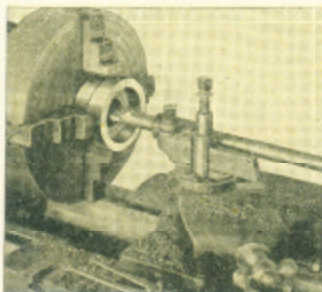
Making a Large Bushing Held in a 4-Jaw Chuck.
